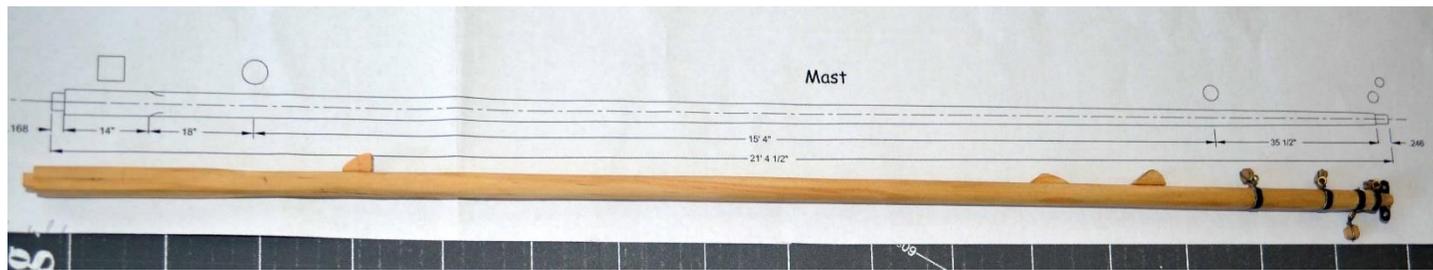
The pine blank used to shape the finished mast starts out 2" longer than needed!
